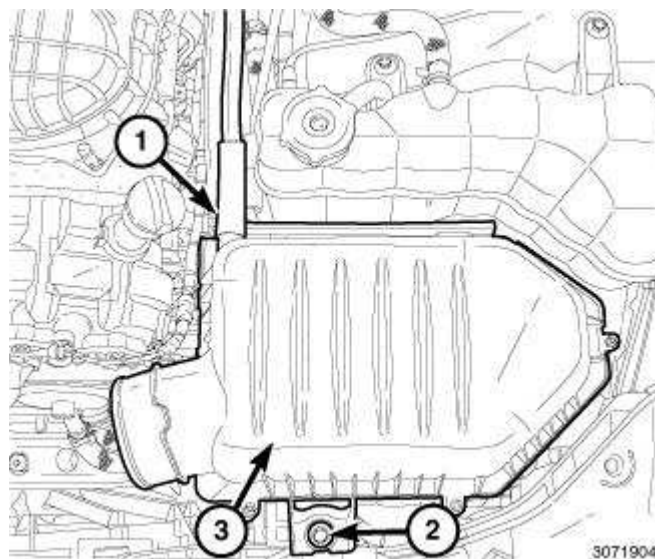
Fresh Air Makeup Hose, Air Cleaner Housing & Bolt
